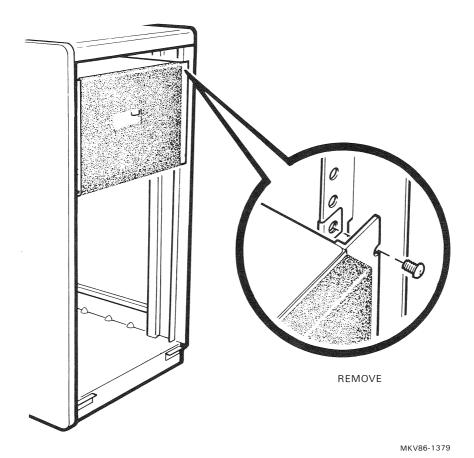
CIPA Mounting Box - Access (Sheet 1 of 3)
